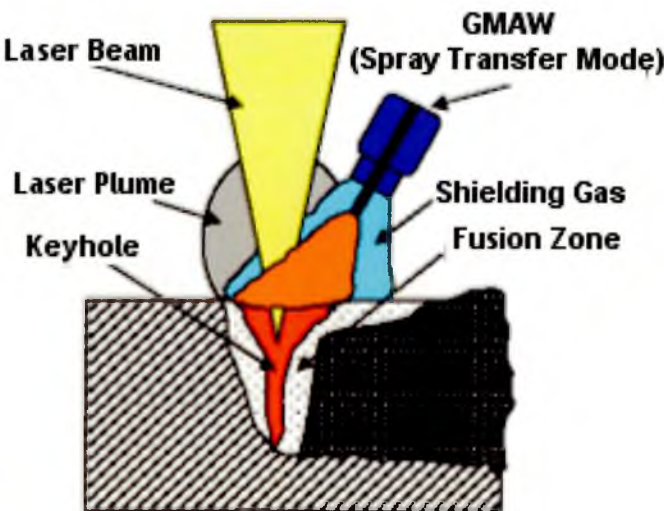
Schematic diagram of the laser hybrid welding modified from source¹³
